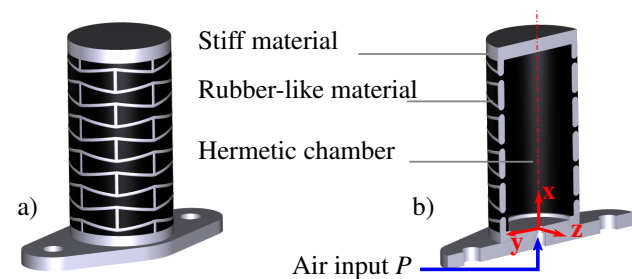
a) CAD view of the complete auxetic actuator with b) cross-sectional detailed view.
